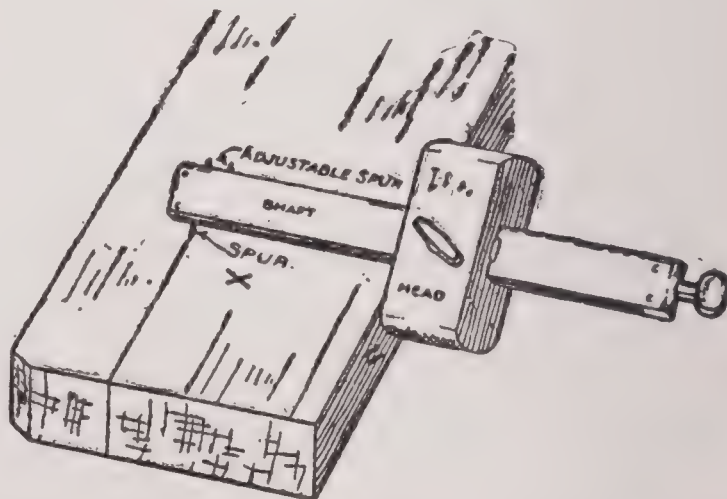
Gauging with a Marking-gauge (a Mortise-gauge).
